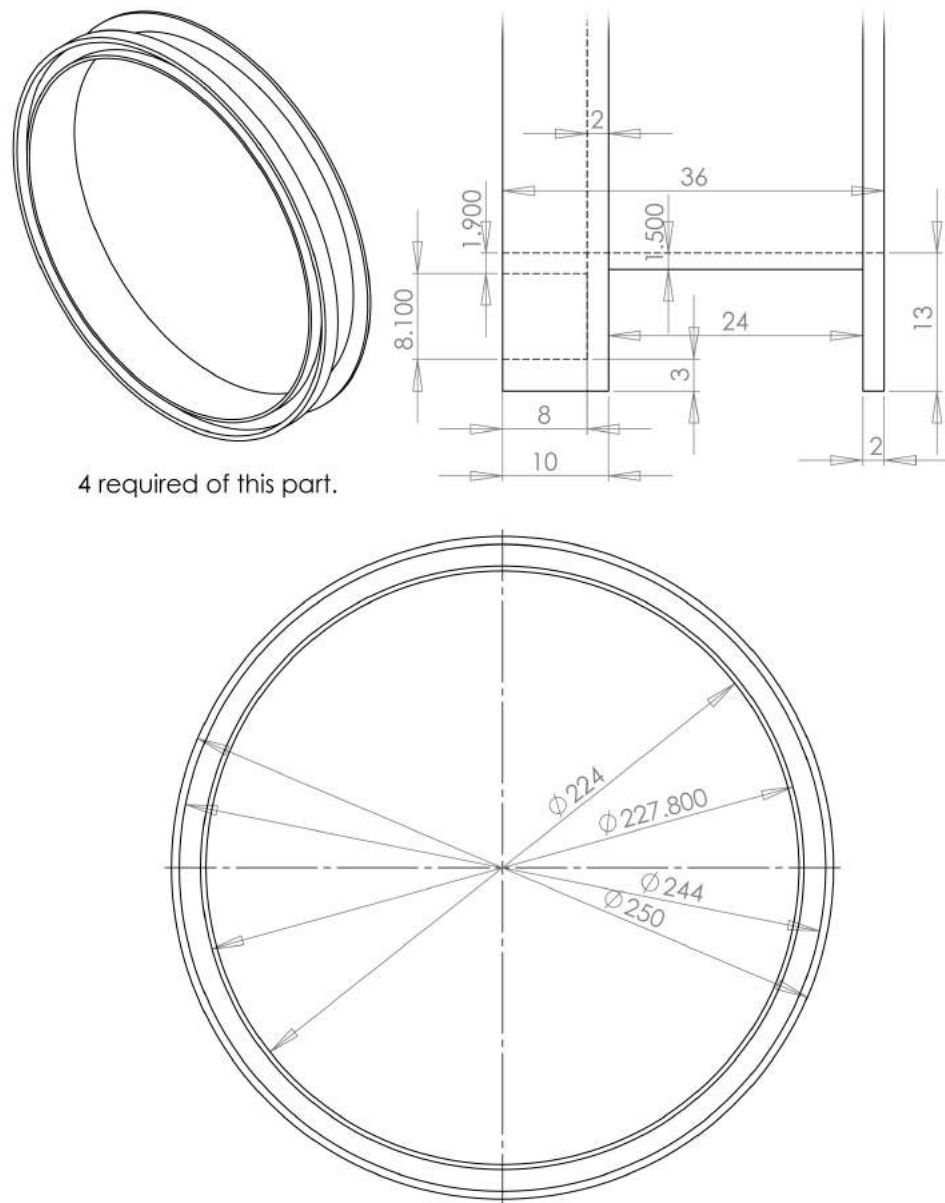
The coil former of the primary compensation coils used for both vacuum systems discussed in Chapter 4. The channel in the side of the former is for retrofitting a water cooling pipe if need be. The only additional machining to this part is a small hole in the side of the former so that the wire can exit at the centre of the coil.
